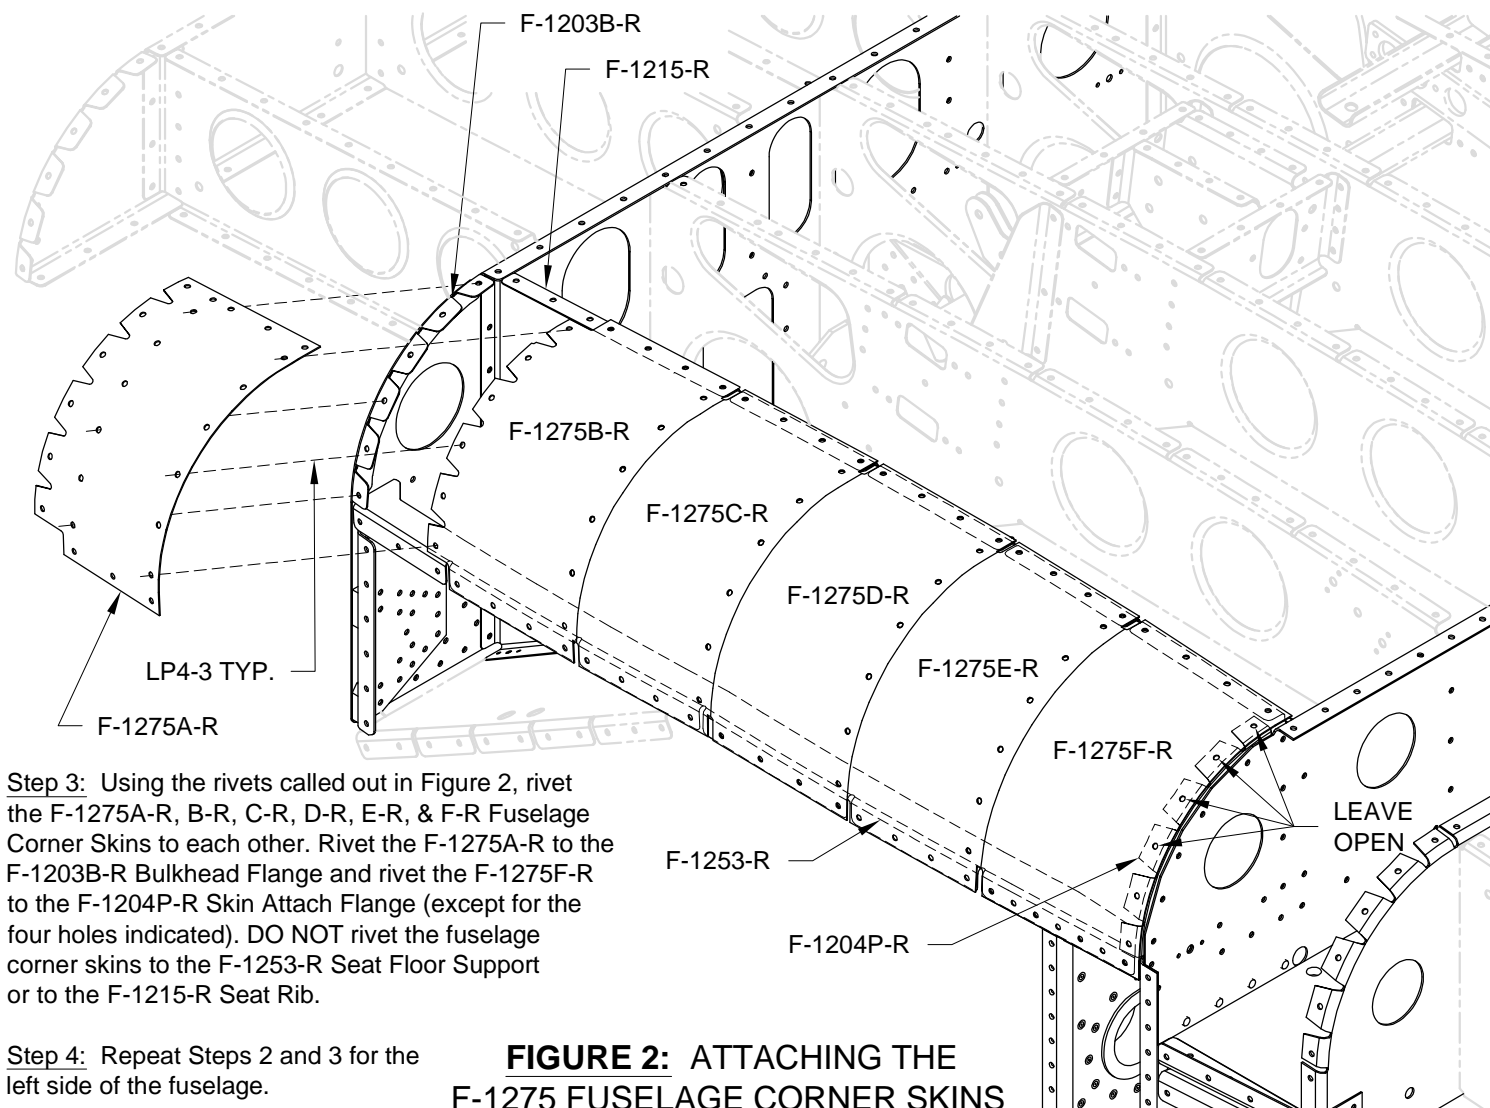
ATTACHING THE F-1275 FUSELAGE CORNER SKINS
